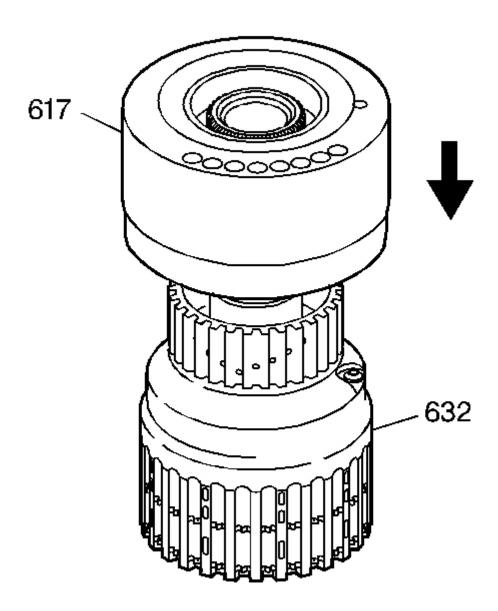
Installing Second Clutch Housing Assembly Onto Second Clutch Hub Courtesy of GENERAL MOTORS CORP.
